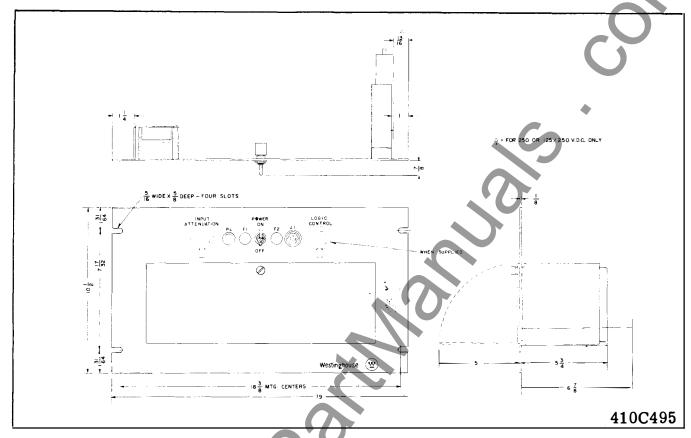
Outline and drilling plan for the type TCF receiver assembly.
